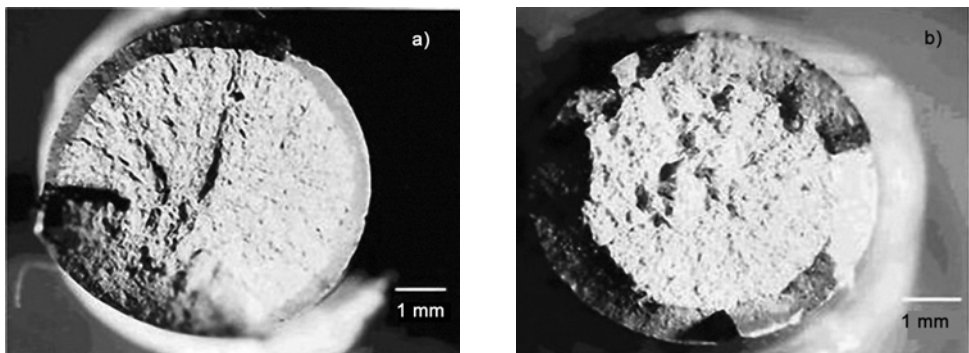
Macrofracture surfaces of tensile tested specimens with: a) 45.3% and b) 63.70% volume fractions of ferrite
